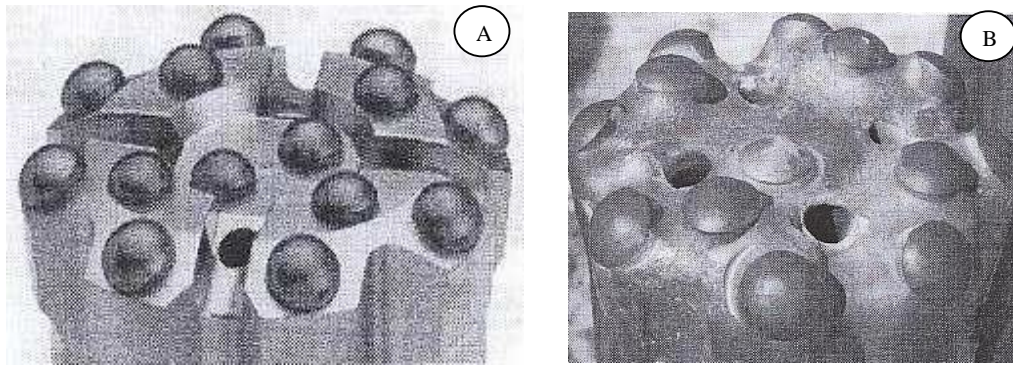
Typical rock drill face embedded with WC-Co buttons. A is unused and B is used. Some of the buttons in B are fractured or worn [2].
